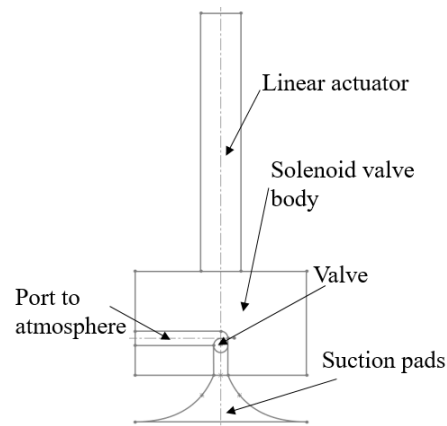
Diagram of the assembly of the suction pad, valve and actuator
